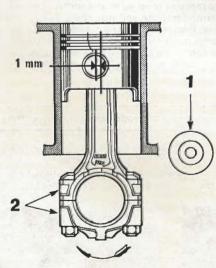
Correct orientation of piston and connecting rod in engine (Sec 32)
